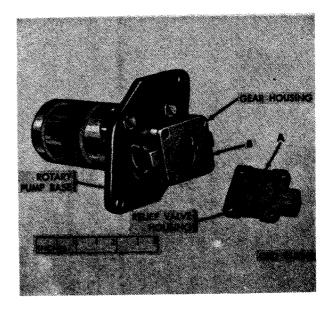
REMOVING OR INSTALLING GEAR HOUSING.
